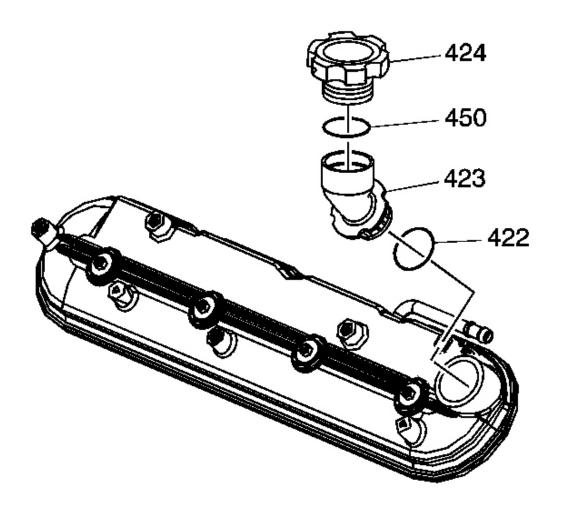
Oil Fill Cap & Oil Fill Tube Courtesy of GENERAL MOTORS CORP.
